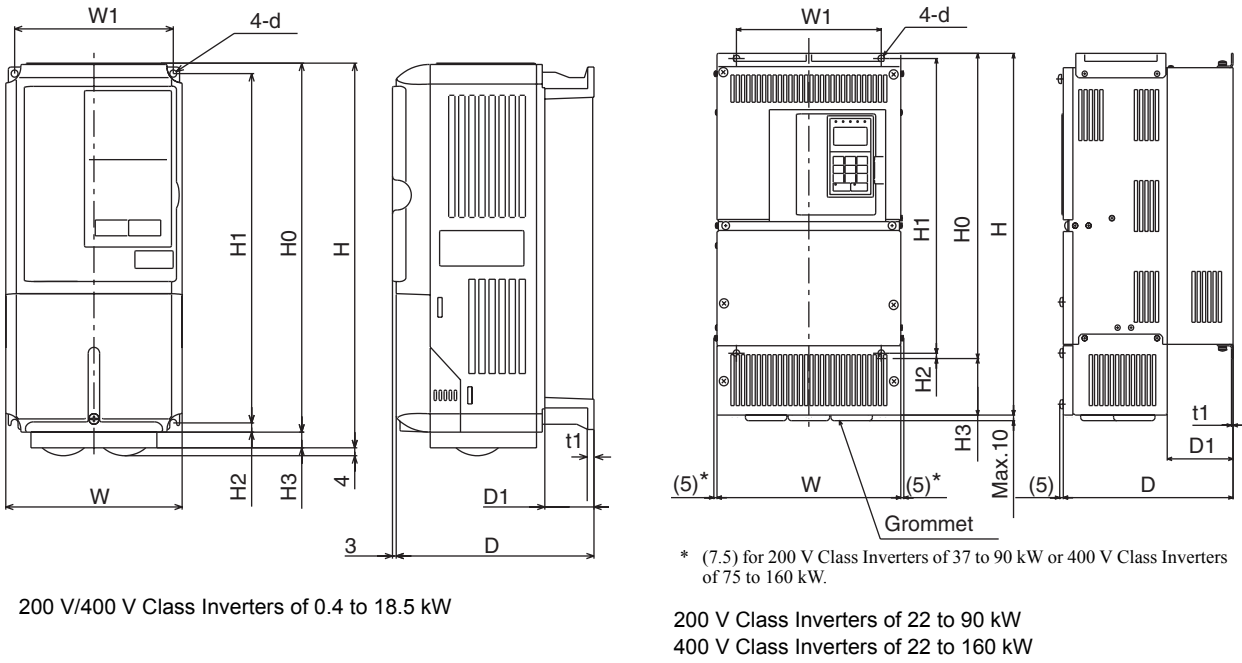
Exterior Diagrams of Enclosed Wall-mounted Inverters
